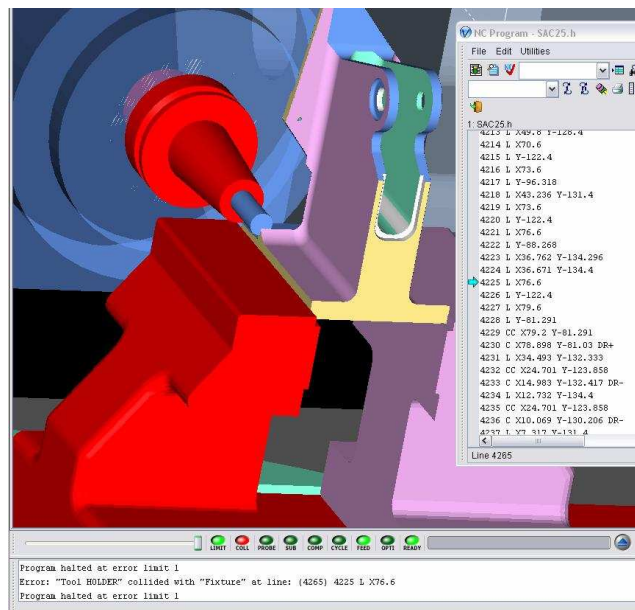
5-axis machining simulation with collision holder-part (red color)
